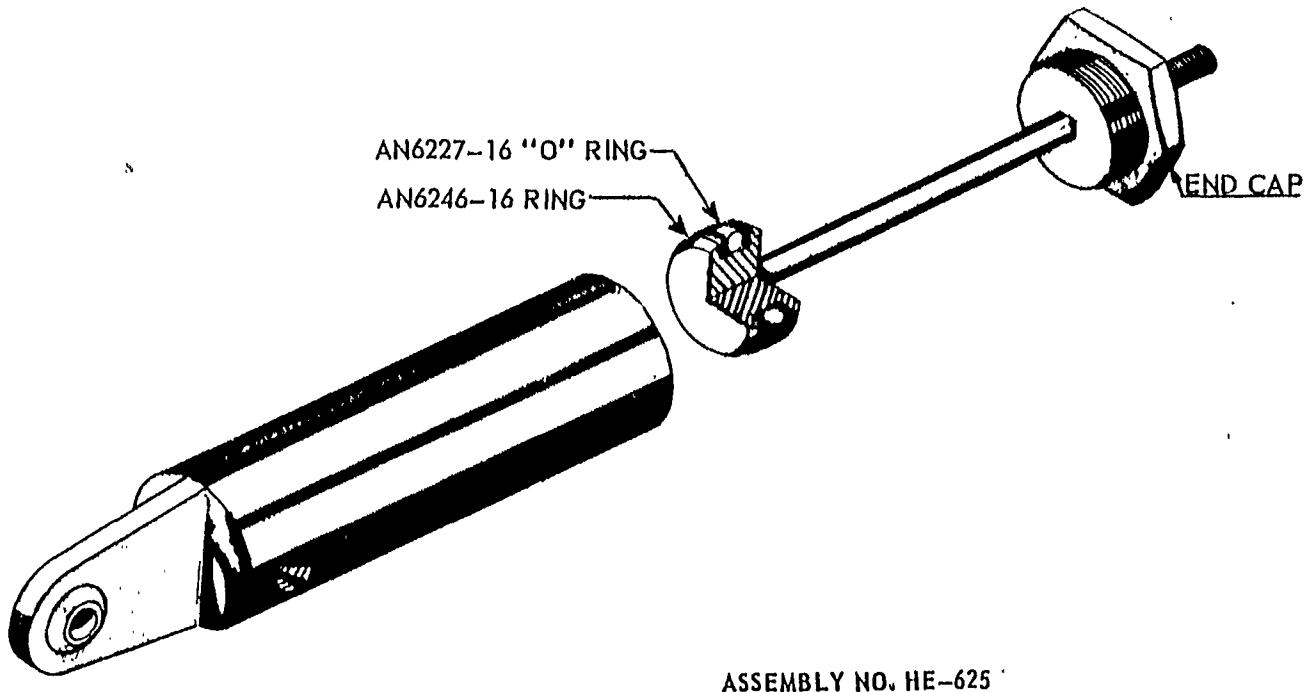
FLAP CYLINDER ASSEMBLY
